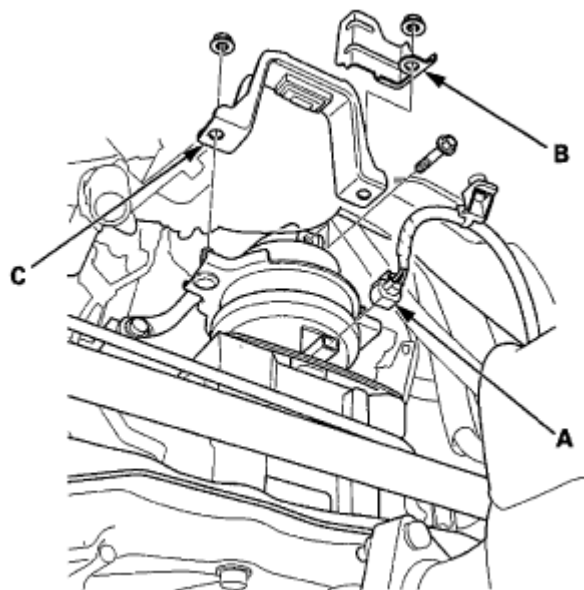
Identifying Rear Engine Mount Actuator Connector, Heat Shield And Rear Engine Mount Stop
